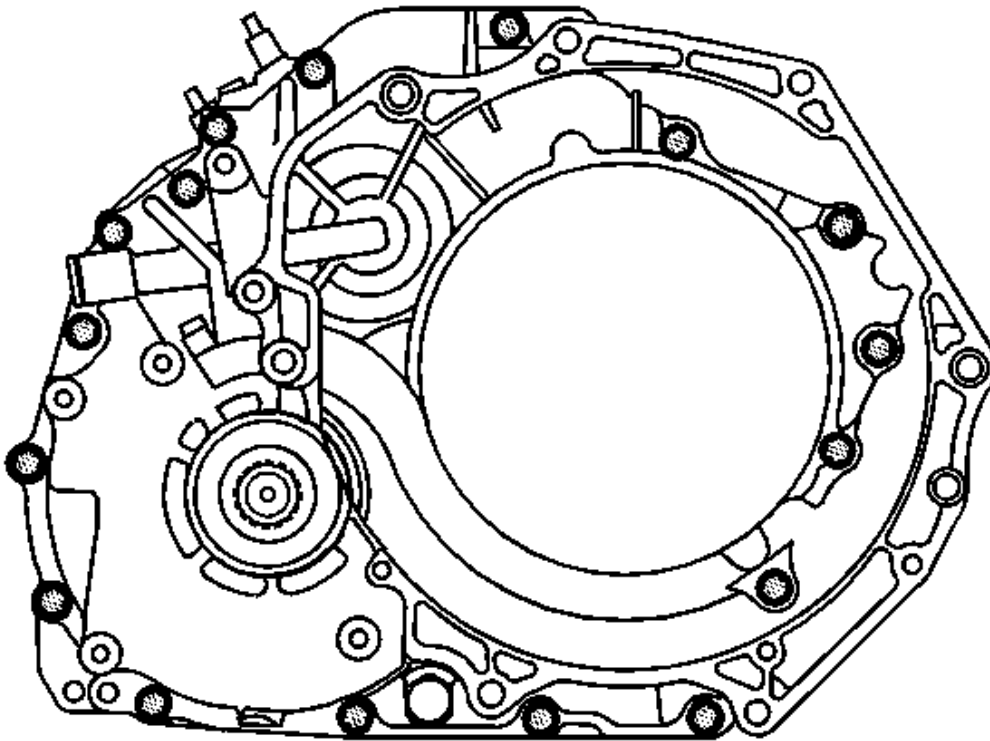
Channel Plate and Upper Channel Plate Assembly
